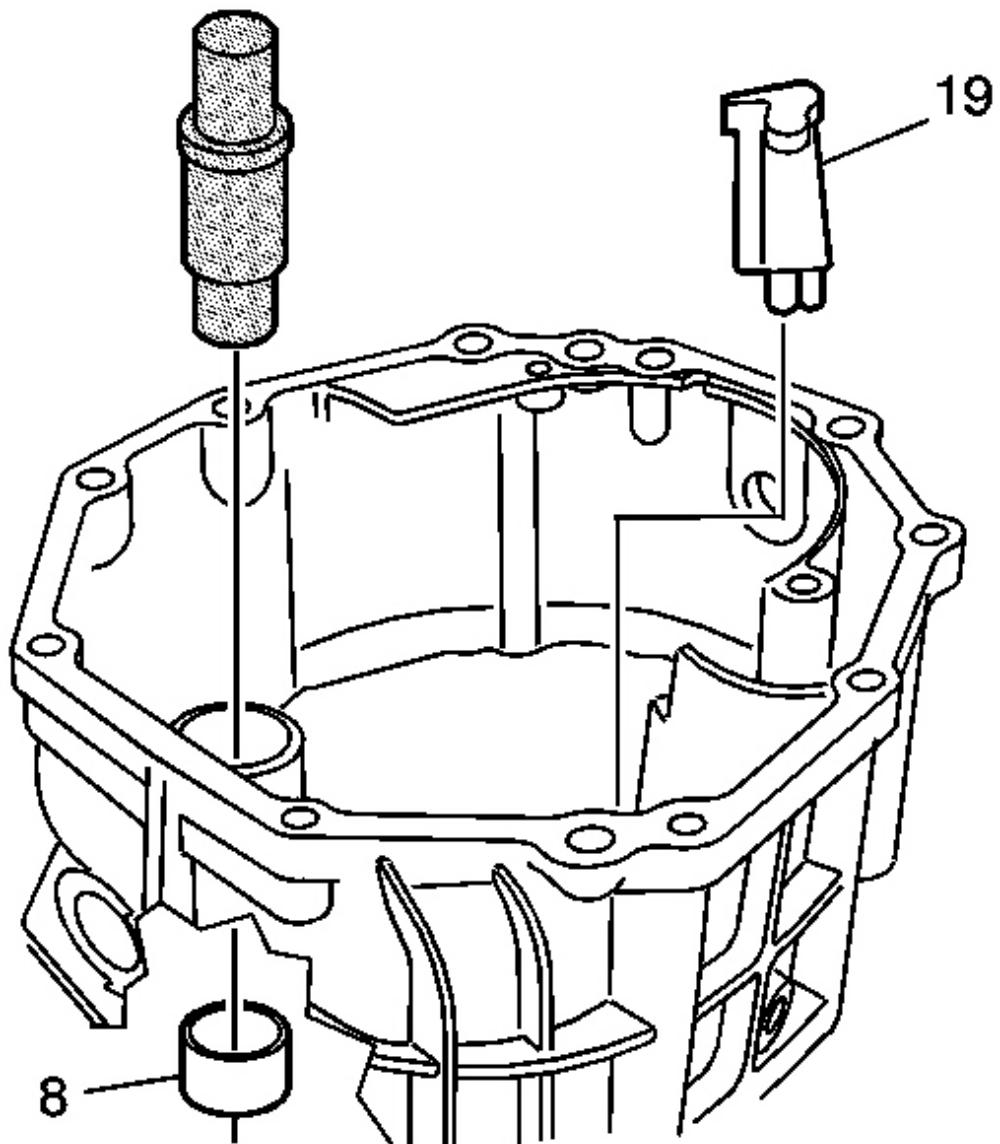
Middle Case Oil Trough & Shift Shaft Bearing
